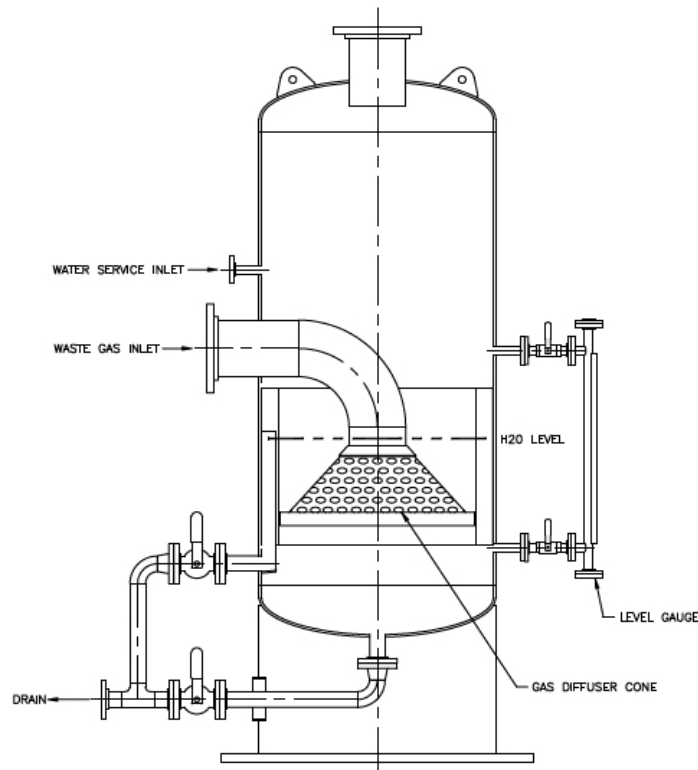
Example of external liquid seal drum to prevent flashback on flare gas feed fuel, from [124].
